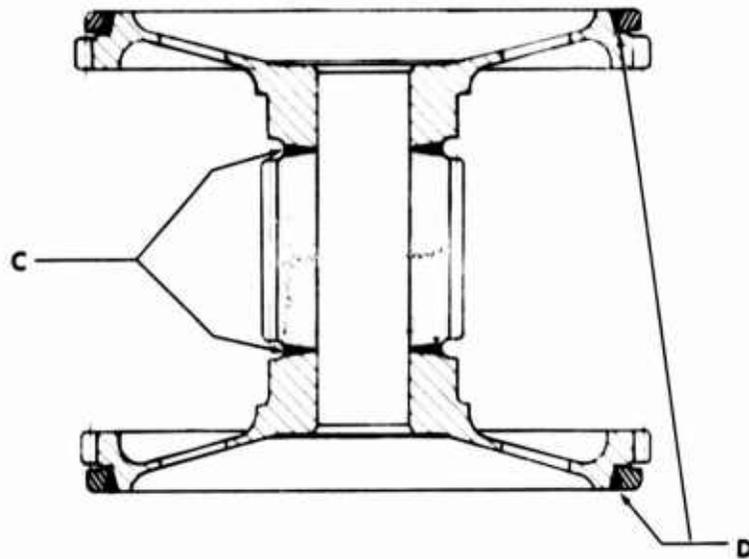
Assembled View of First-Row Pinion Showing Electron Beam Welds (Butt Weld Configuration).
